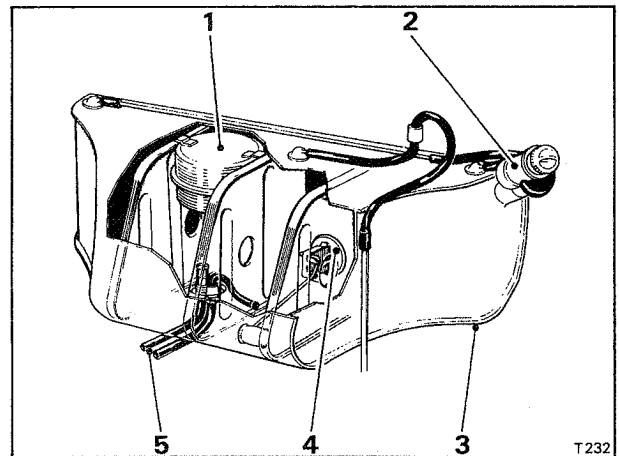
Fuel tank assembly (U.S.A. and Canada)
